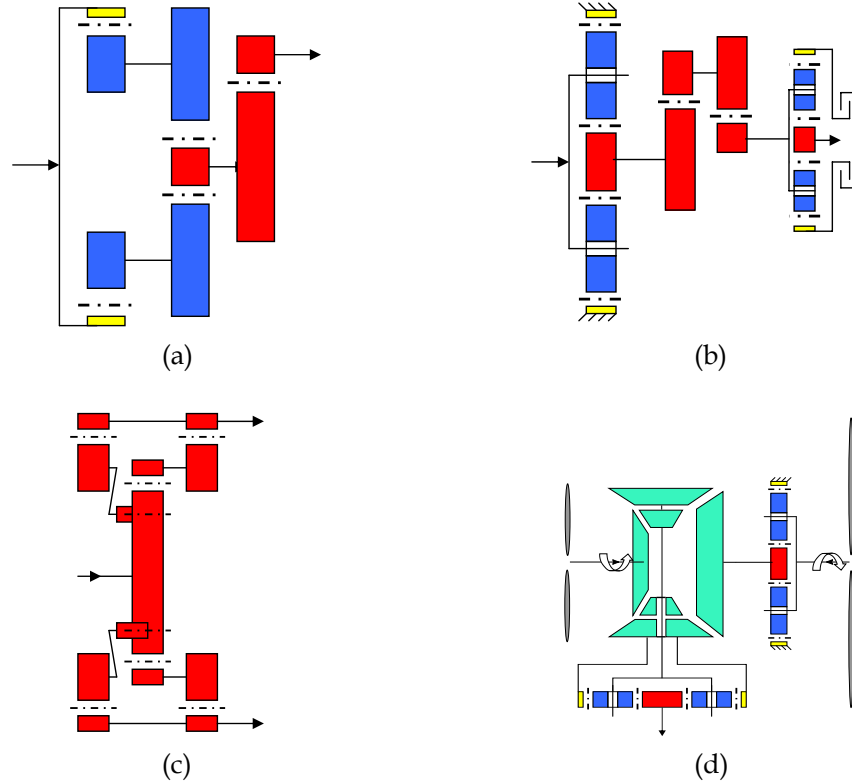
Several gearbox concepts: (a) Planetary gear stage, fixed Planet: Renk Aero-gear; (b) Hydraulic torque limiting: Henderson Gearbox; (c) Power Split, several Generators: Clipper ; (d) Two inputs: Luv and Lee Rotor, Kowintec, [18].
